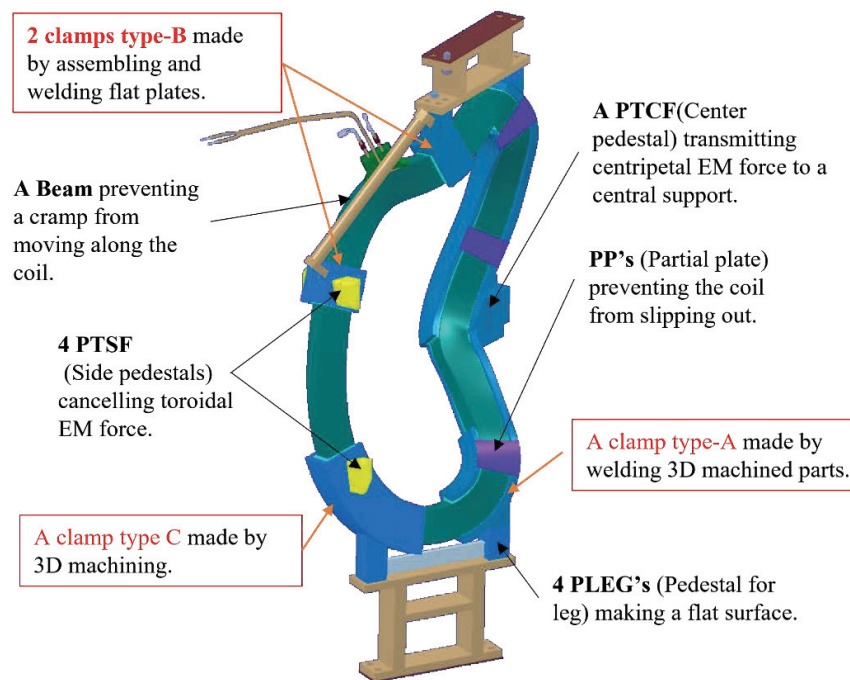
Modular coil with the partial clamping type coil case. In order to withstand a large electromagnetic force, reinforcement with a metal container is necessary. The figure shows a design example using a machined U-shaped clamps as a coil container. We will call it a partial large clamp type (PLCL).
